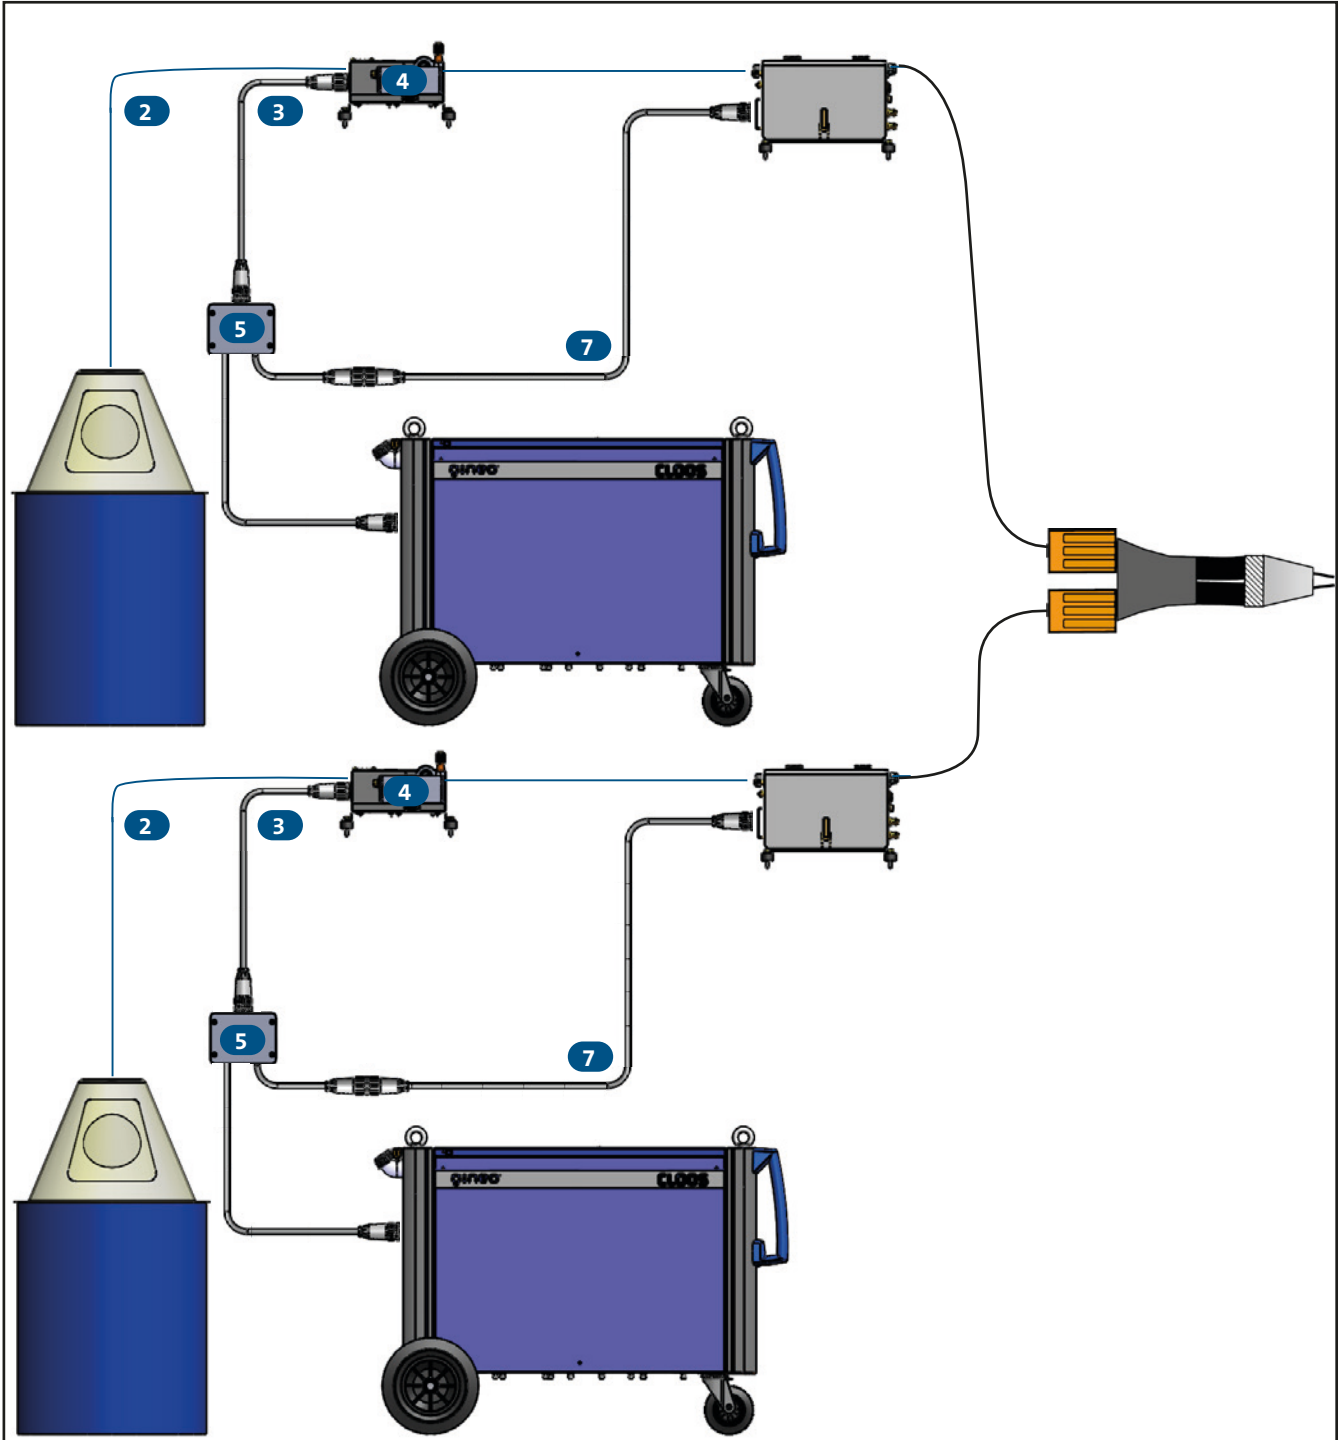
QWD-B connection diagram for the Tandem welding process
